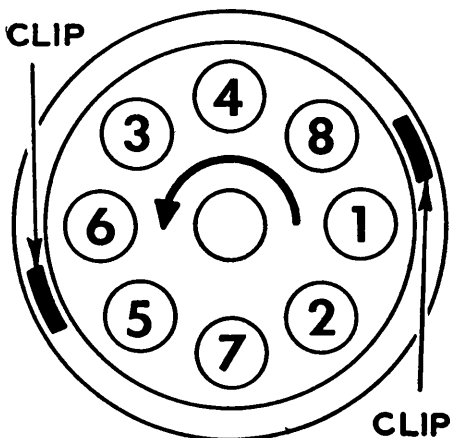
Diagram of 1949-52 distributor cap showing firing order, direction of rotation and location of cap clips
